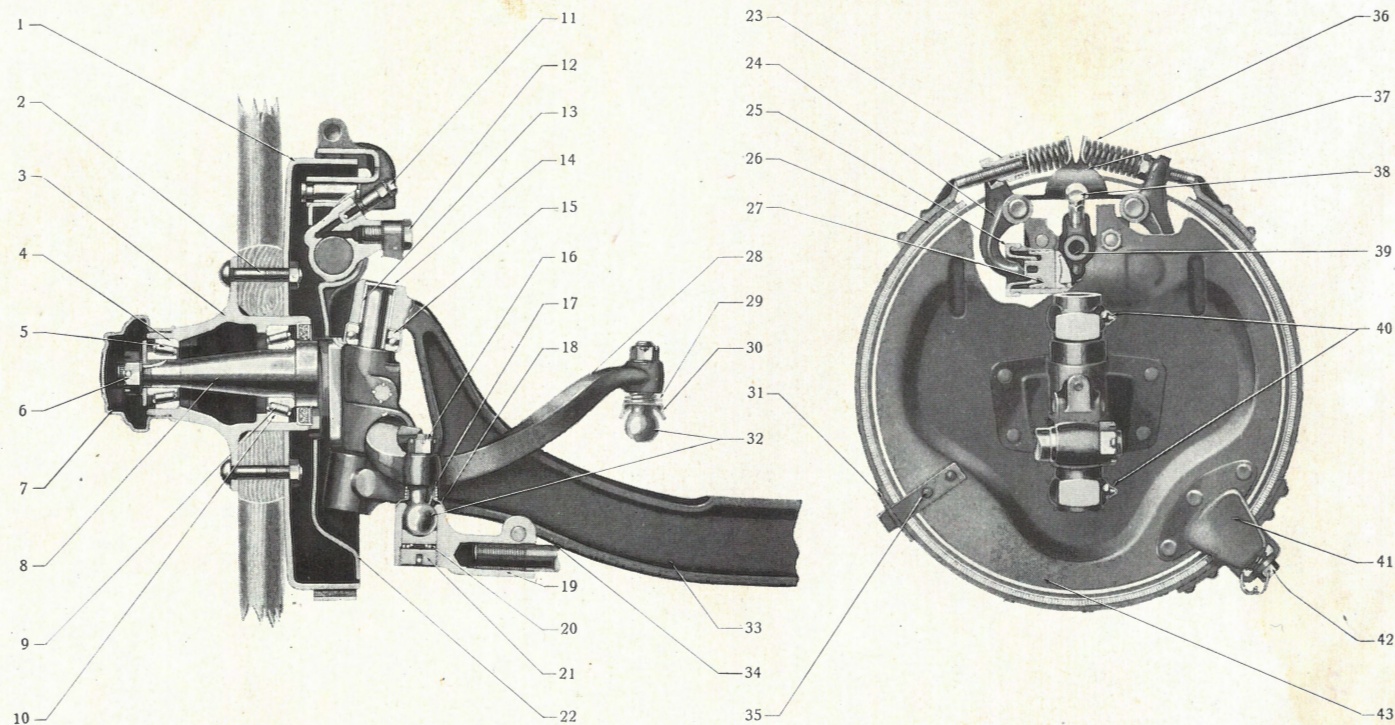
Front Axle—Hydraulic Four-Wheel Brakes
